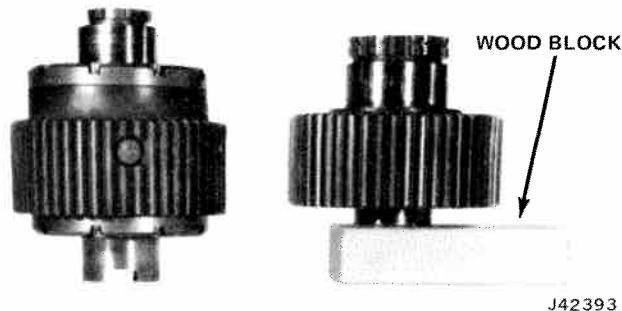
Differential and Drive Sprocket Positioned for Chain Installation
